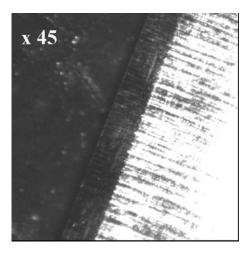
Microscopic view (×45) of a sharpened blade after multistage grinding
